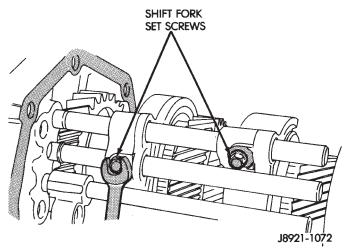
Remove Shift Fork To Shift Rail Bolts
